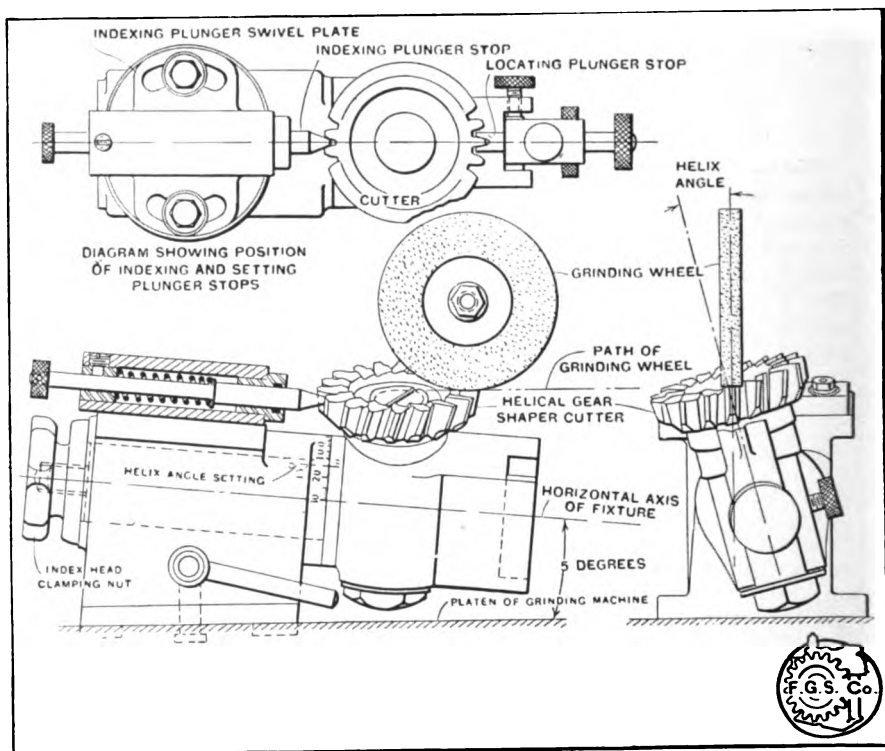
Diagram Illustrating Angles at which the Helical Cutter is Held when Sharpening
